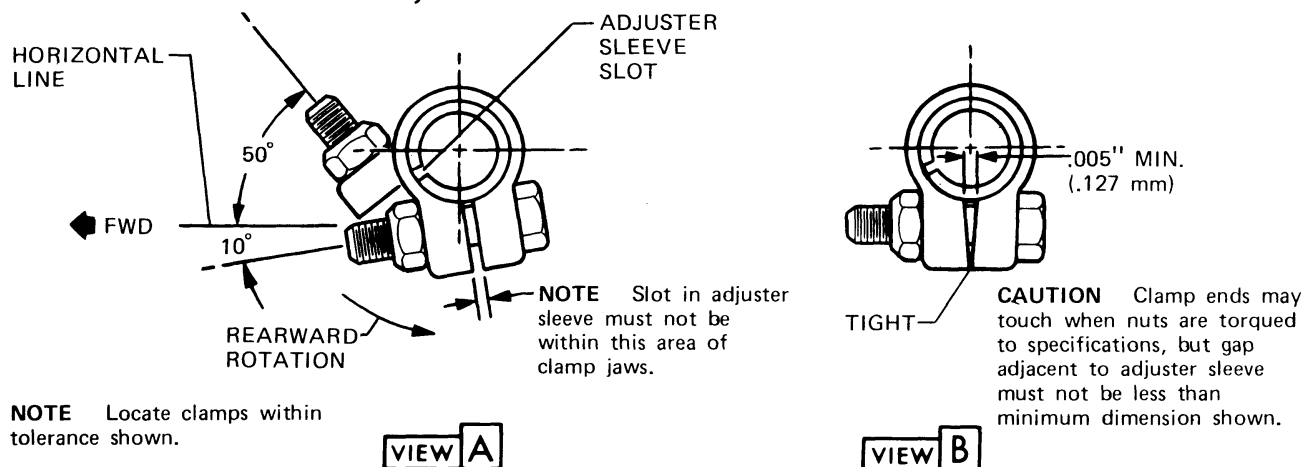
B-128A--Tie Rod Clamp and Sleeve Orientation
